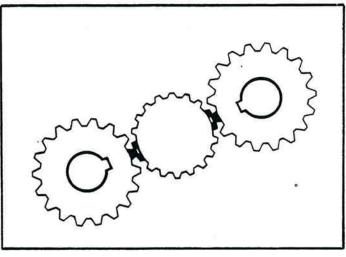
Countershaft Drive Gear Teeth Meshed With Main Drive Gear Teeth For Proper Timing.
